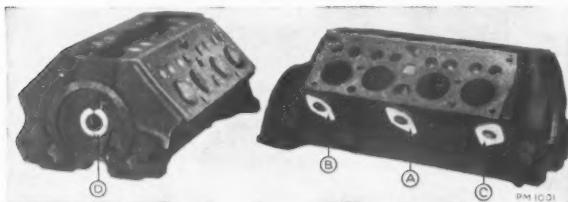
8-cylinder block on which 7 surfaces are machined.
